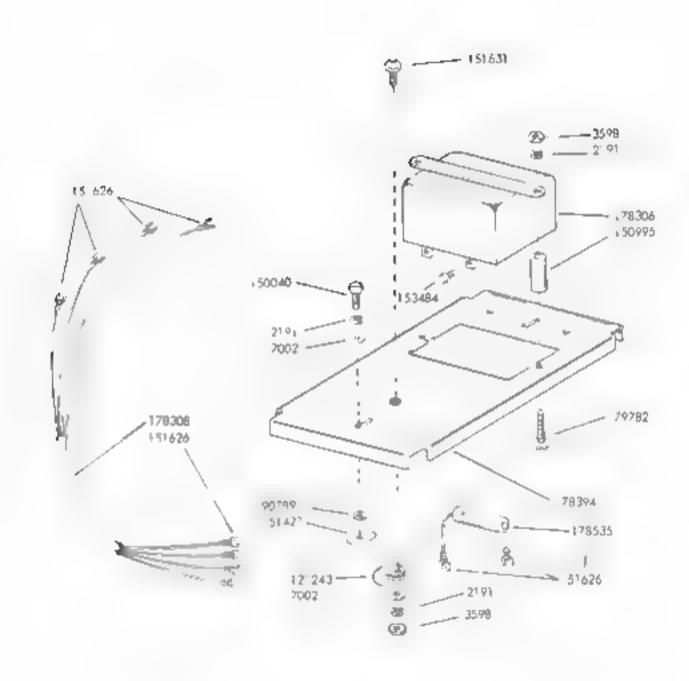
, 178307 MOTOR CONTROL RELAY ASSEMBLY
